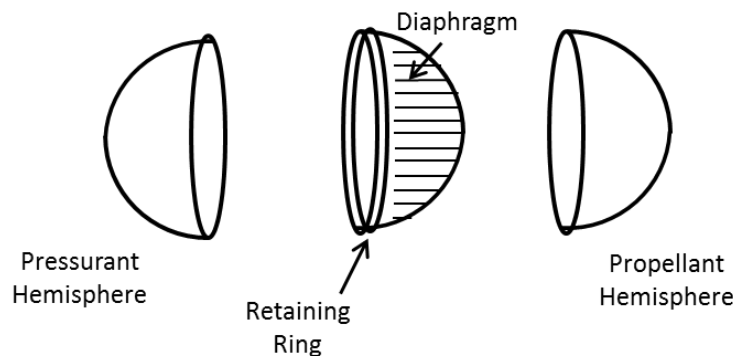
Schematic of a Diaphragm Assembly. The molded diaphragm is welded between the two hemispheres.
